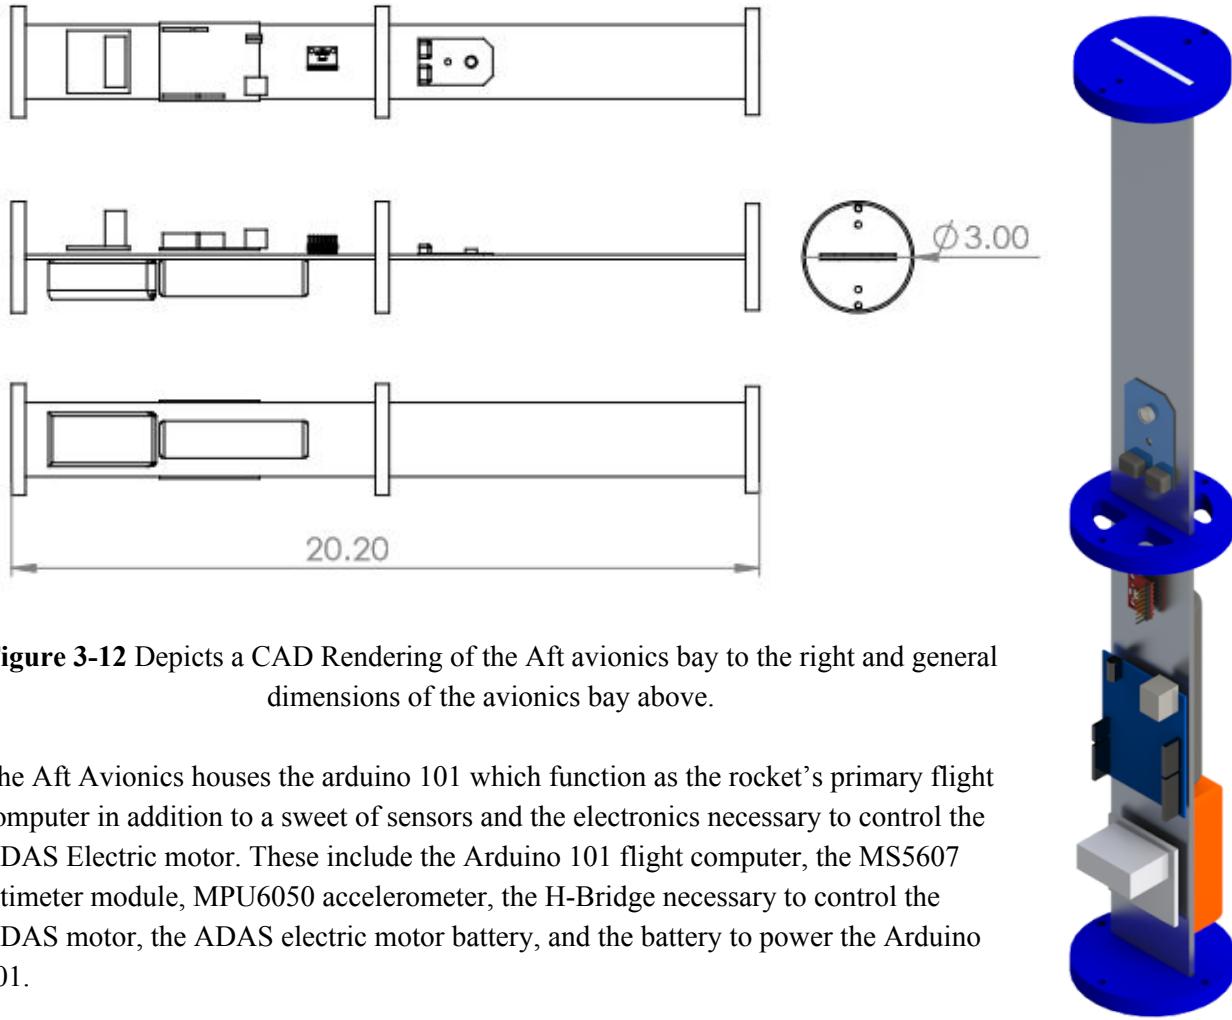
Depicts a CAD Rendering of the Aft avionics bay to the right and general dimensions of the avionics bay above.
